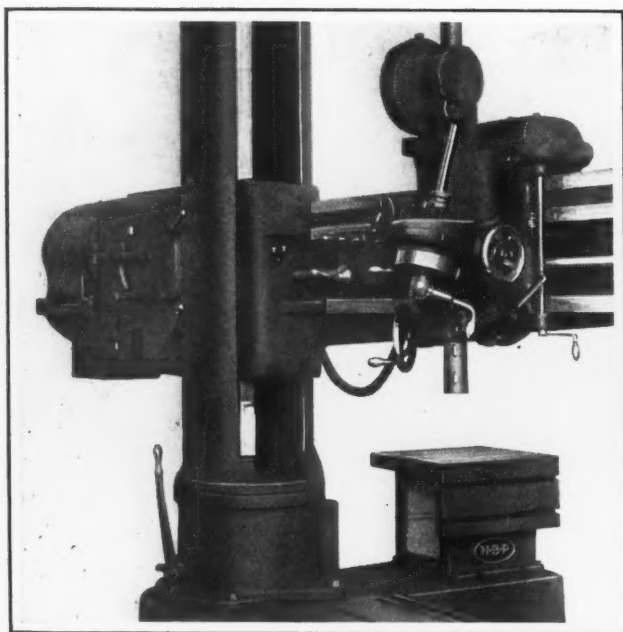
Radial Drilling Machine Driven by Direct-current Motor Mounted at End of Arm
